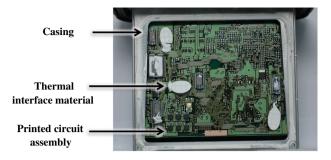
Printed circuit assembly in the ECU (bottom side of the board).
